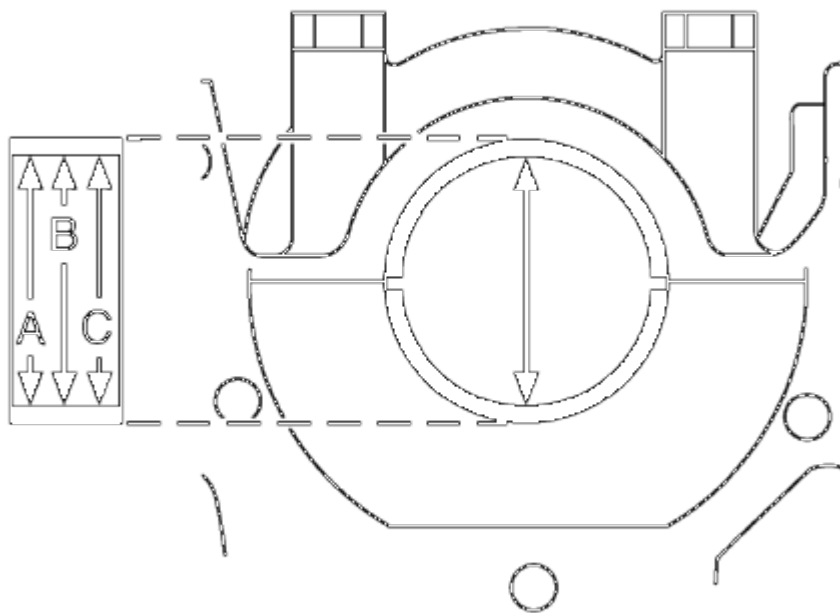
Measuring Crankshaft Bearing Diameter At Points
